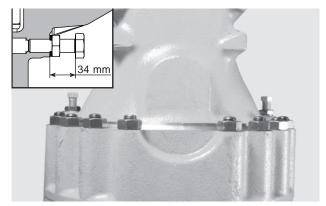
Adjust screws (31) to obtain a distance of 34 ± 0.5 mm between axle machined surface and screw underhead.
